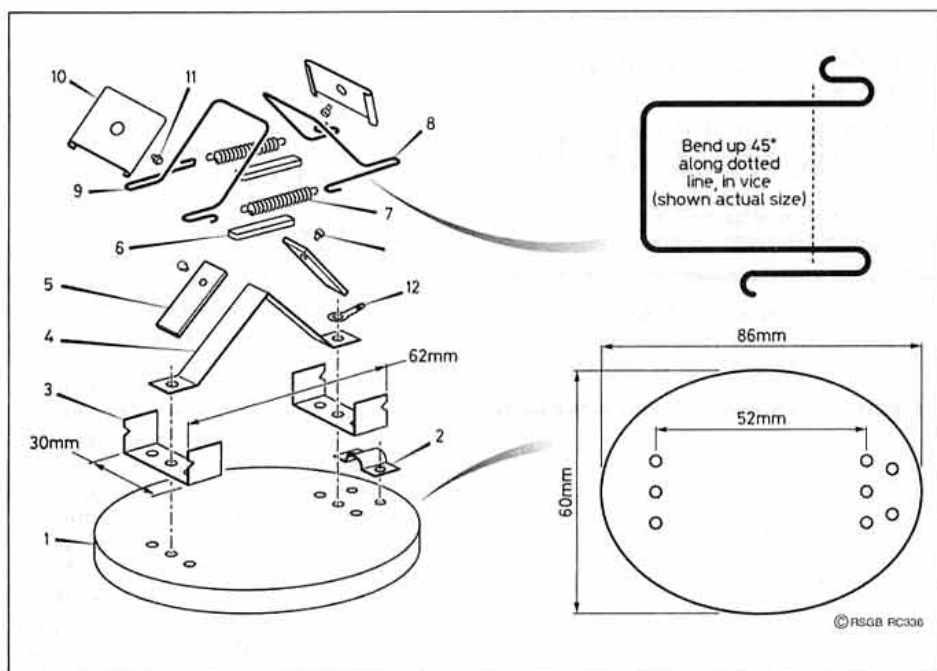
Exploded view of the Mouse Trap paddle with frame bending template. The item numbers are referenced in the components lists.
